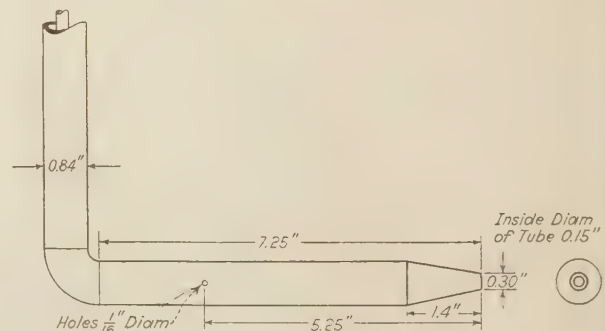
DIMENSIONED DRAWING OF TULANE PITOT TUBE
